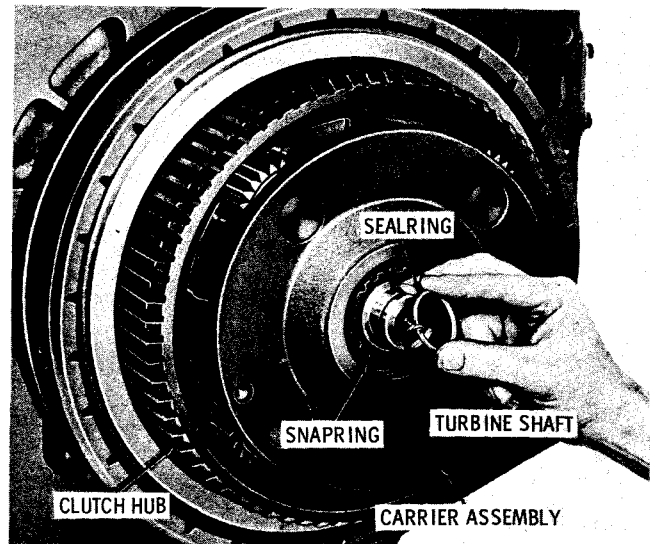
Removing hook-type sealing from rear end of turbine shaft (CT, CLT, VCLT) S1593
